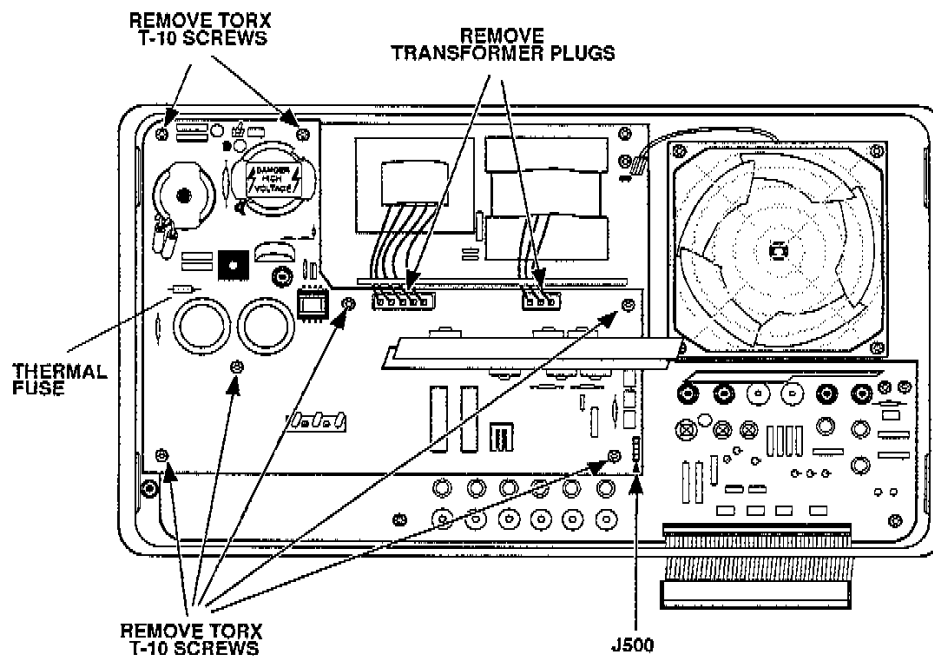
Removing the Power Supply Primary board and location of the thermal fuse.
